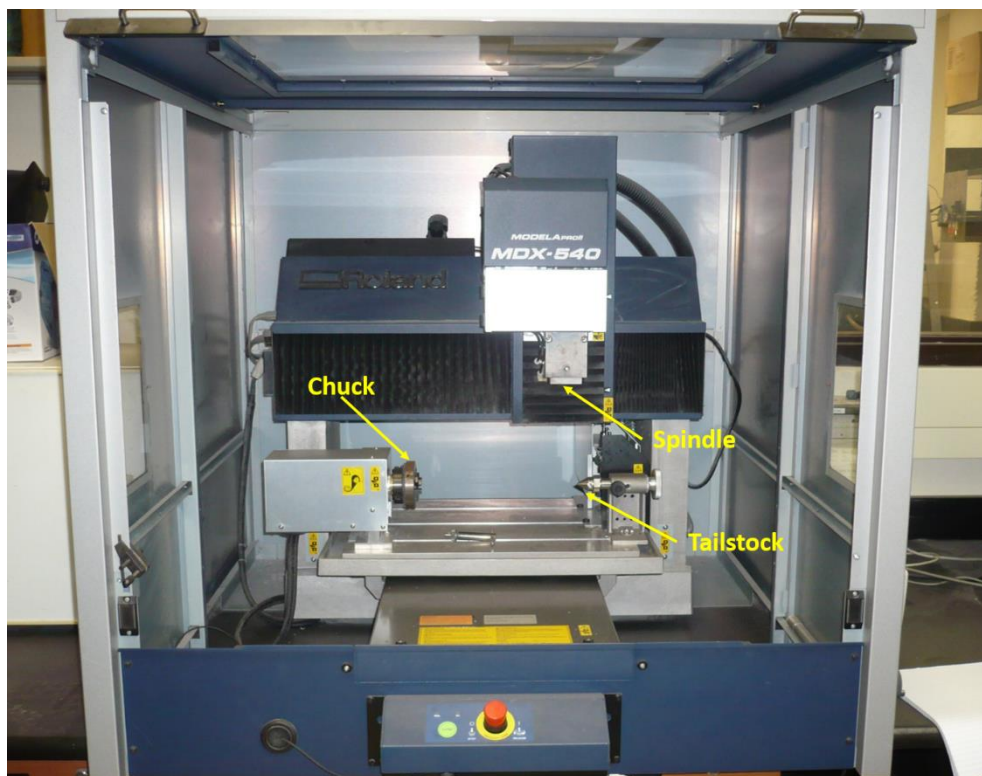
Our four-axis CNC Mill in the Earth Sciences Machine Shop. It is the MODALapro MDX-540 manufactured by Roland.
